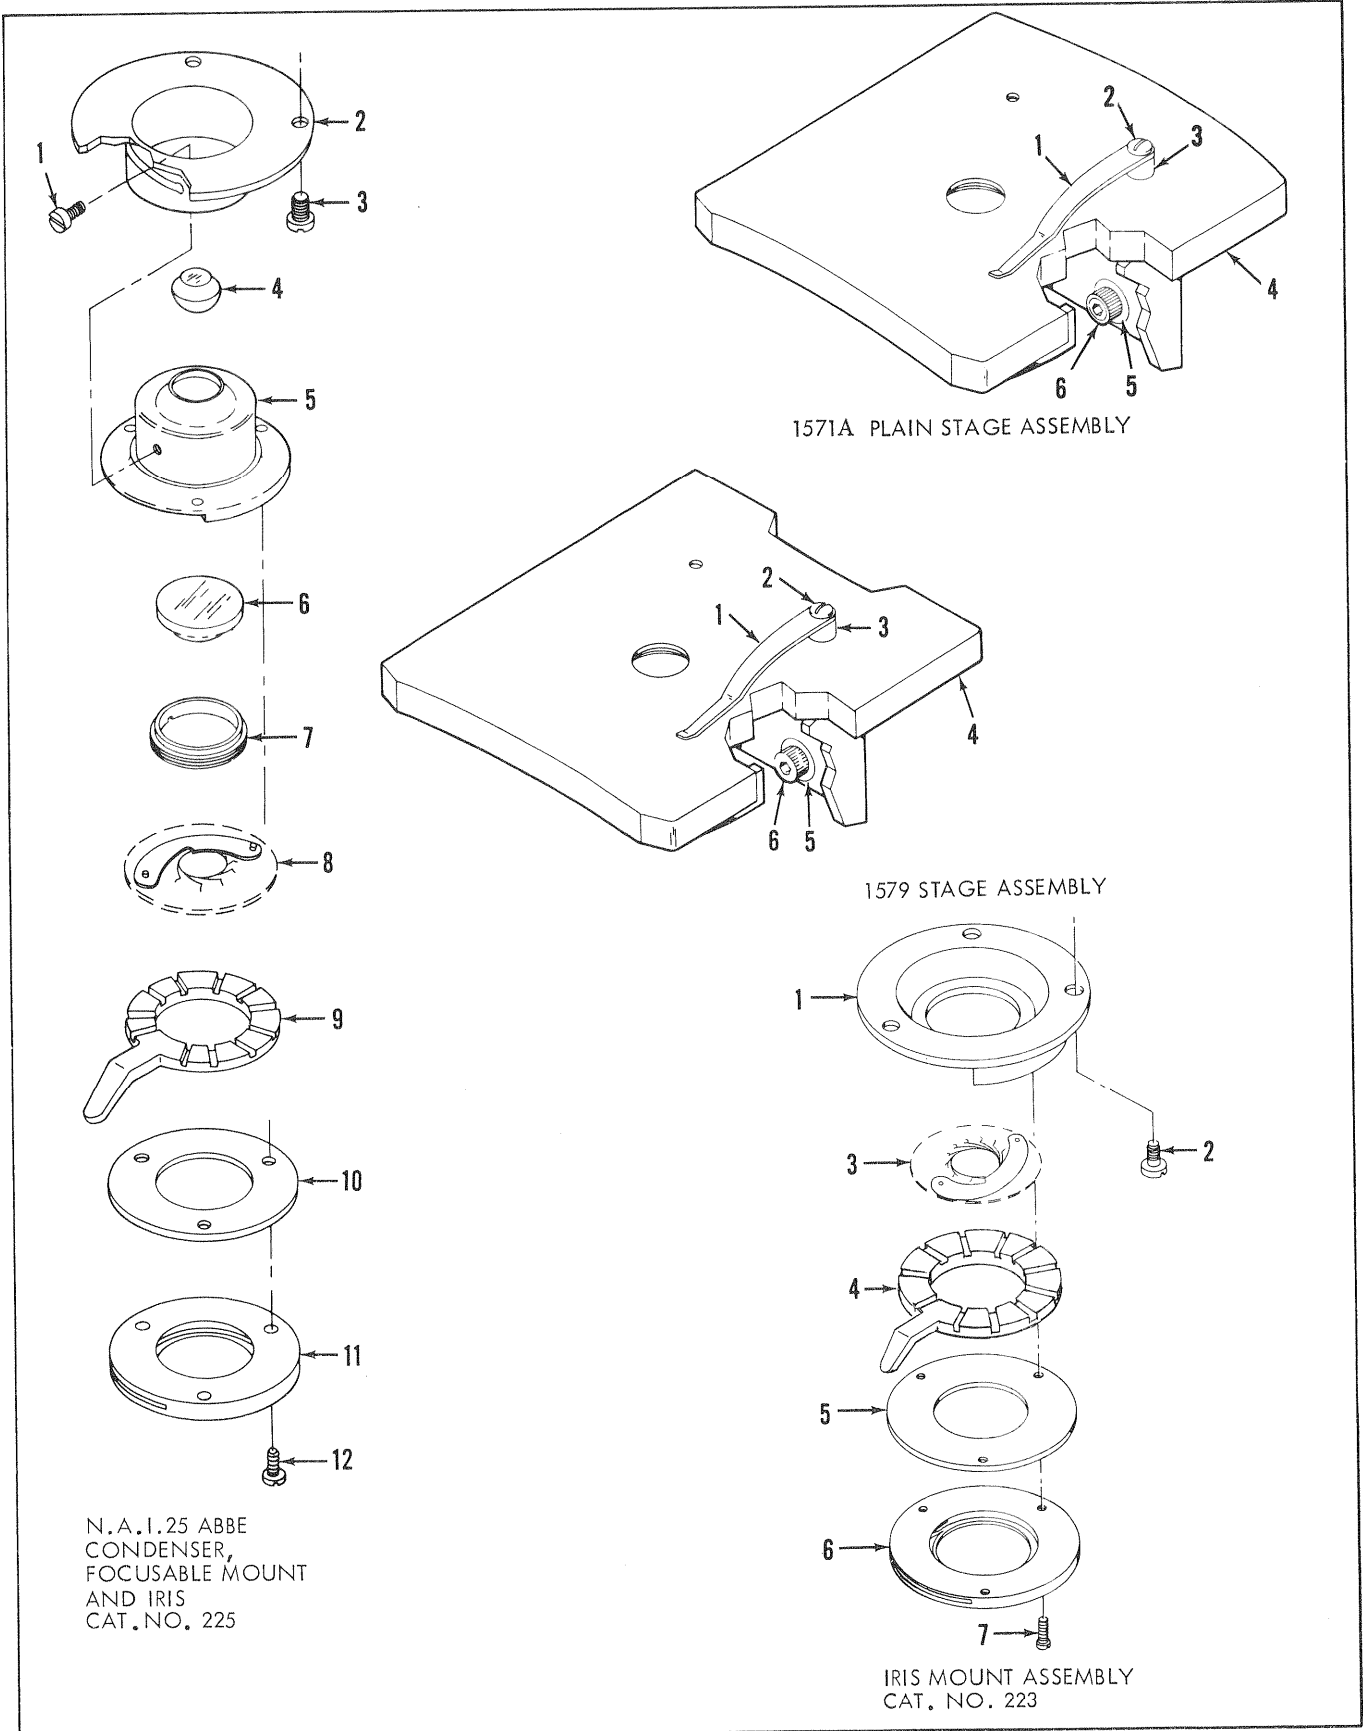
Plain Stage, Condensers, and Iris Mount Assembly
